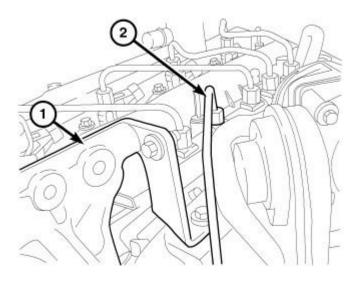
GENERATOR MOUNTING BRACKET & BOLTS Courtesy of CHRYSLER LLC
